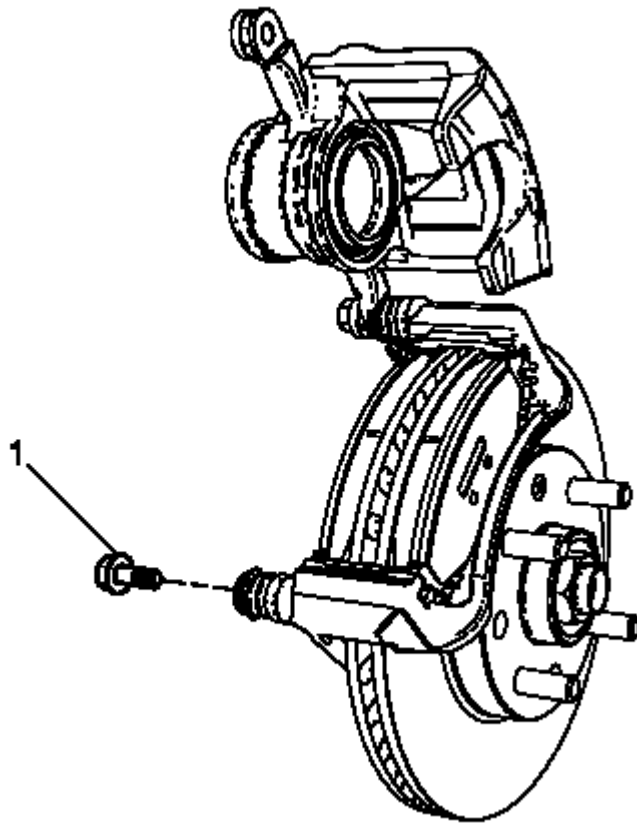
Brake Caliper Lower Guide Pin Bolt
